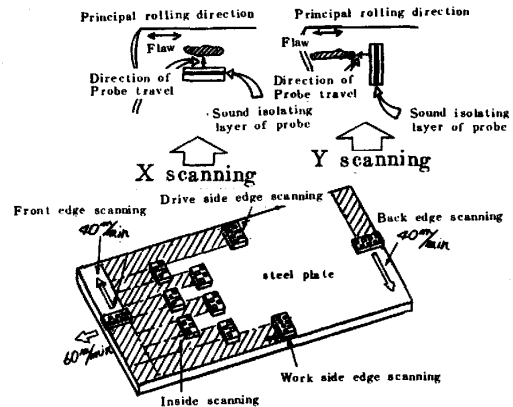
Scanning Pattern of the Heavy Plate Testing Installation
